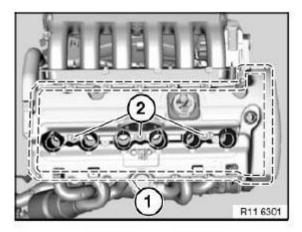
Identifying Threaded Pins And Screw Mounting Area Courtesy of BMW OF NORTH AMERICA, INC.
